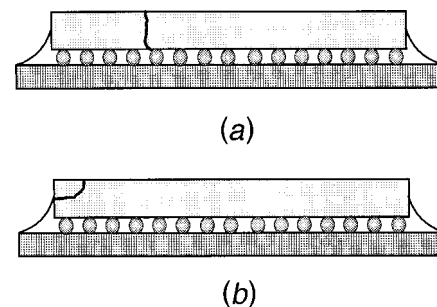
Silicon die cracks in flip chip assemblies—(a) cracks from surface defects, (b) cracks from edge defects
